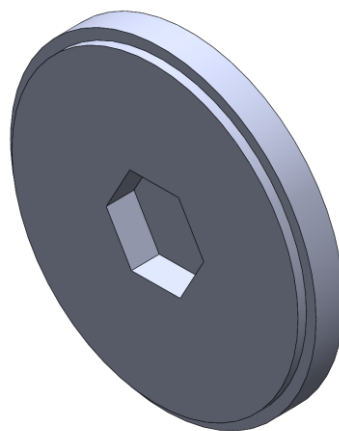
Endcap inside, showing the hexagonal cutout.
